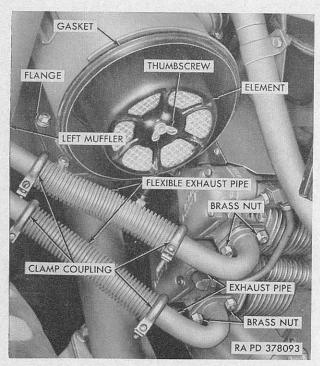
Right exhaust manifolds—air cleaner oil reservoir removed.
